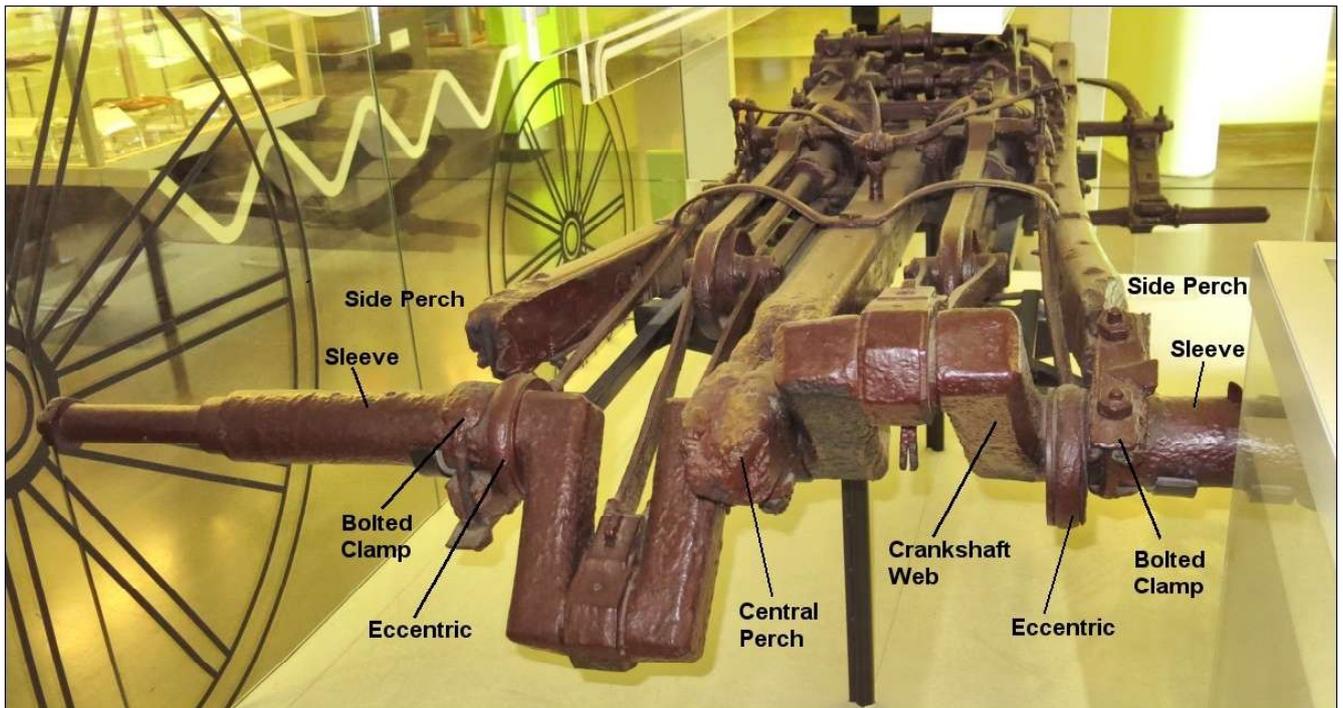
Rear end view of Gurney's Drag of 1831. Showing the relation of the crankshaft, eccentrics, central and side perches and rear axle sleeve.
